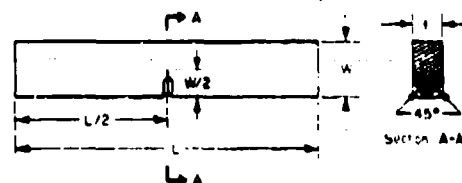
SLOW BEND FRACTURE TOUGHNESS SPECIMEN
